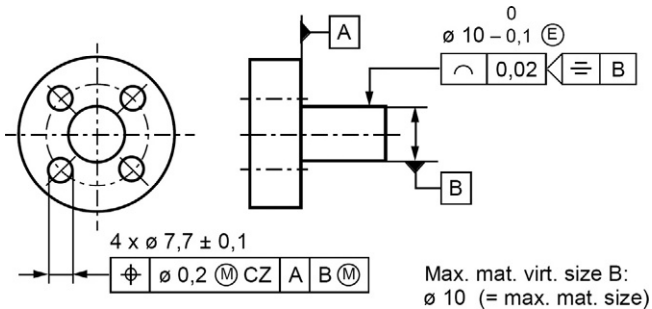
Maximum material virtual size of datum B; form tolerance (straightness) to be disregarded for B \textcircled{M}
